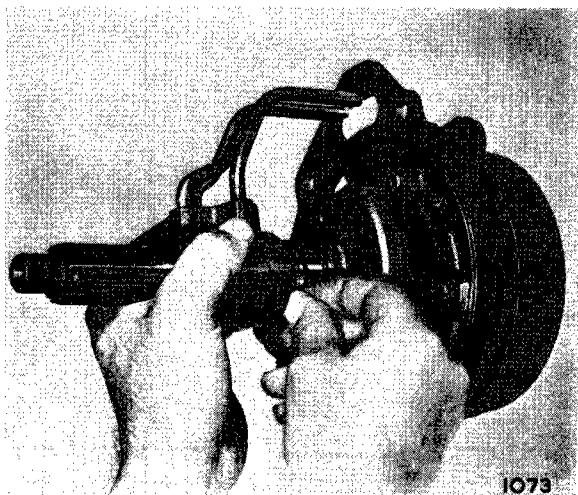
Installation of the oil collector sleeve and tube
